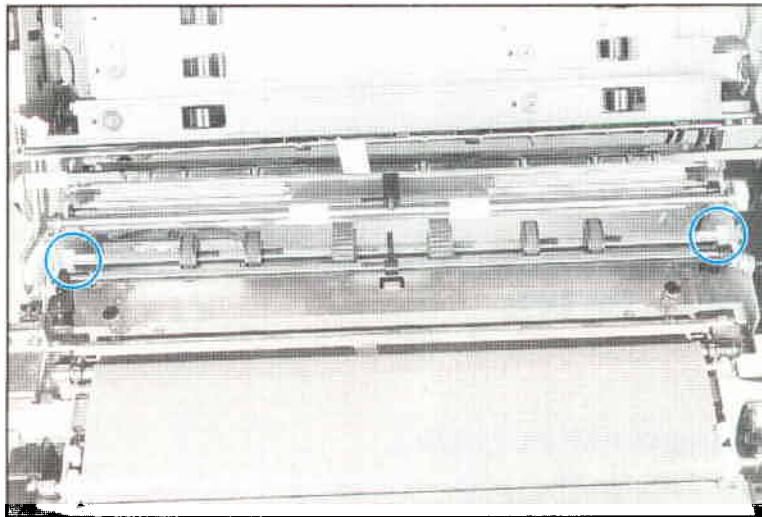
Pickup Roller Shaft Keeper Bushing
